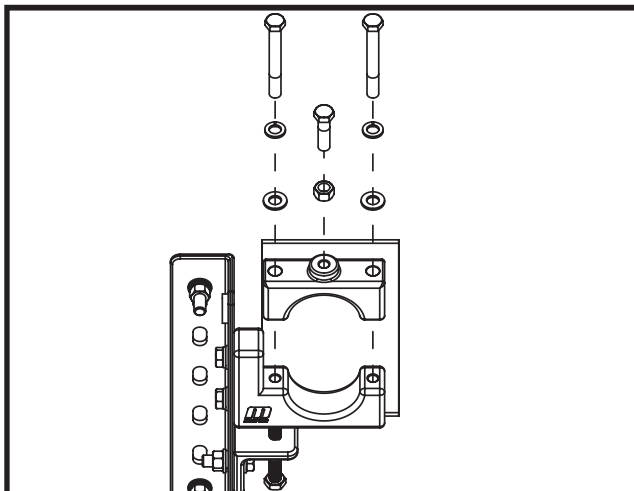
Martin® P2 Secondary Belt Cleaner HD Operator Bolt Tensioner Clamp Block Hardware
